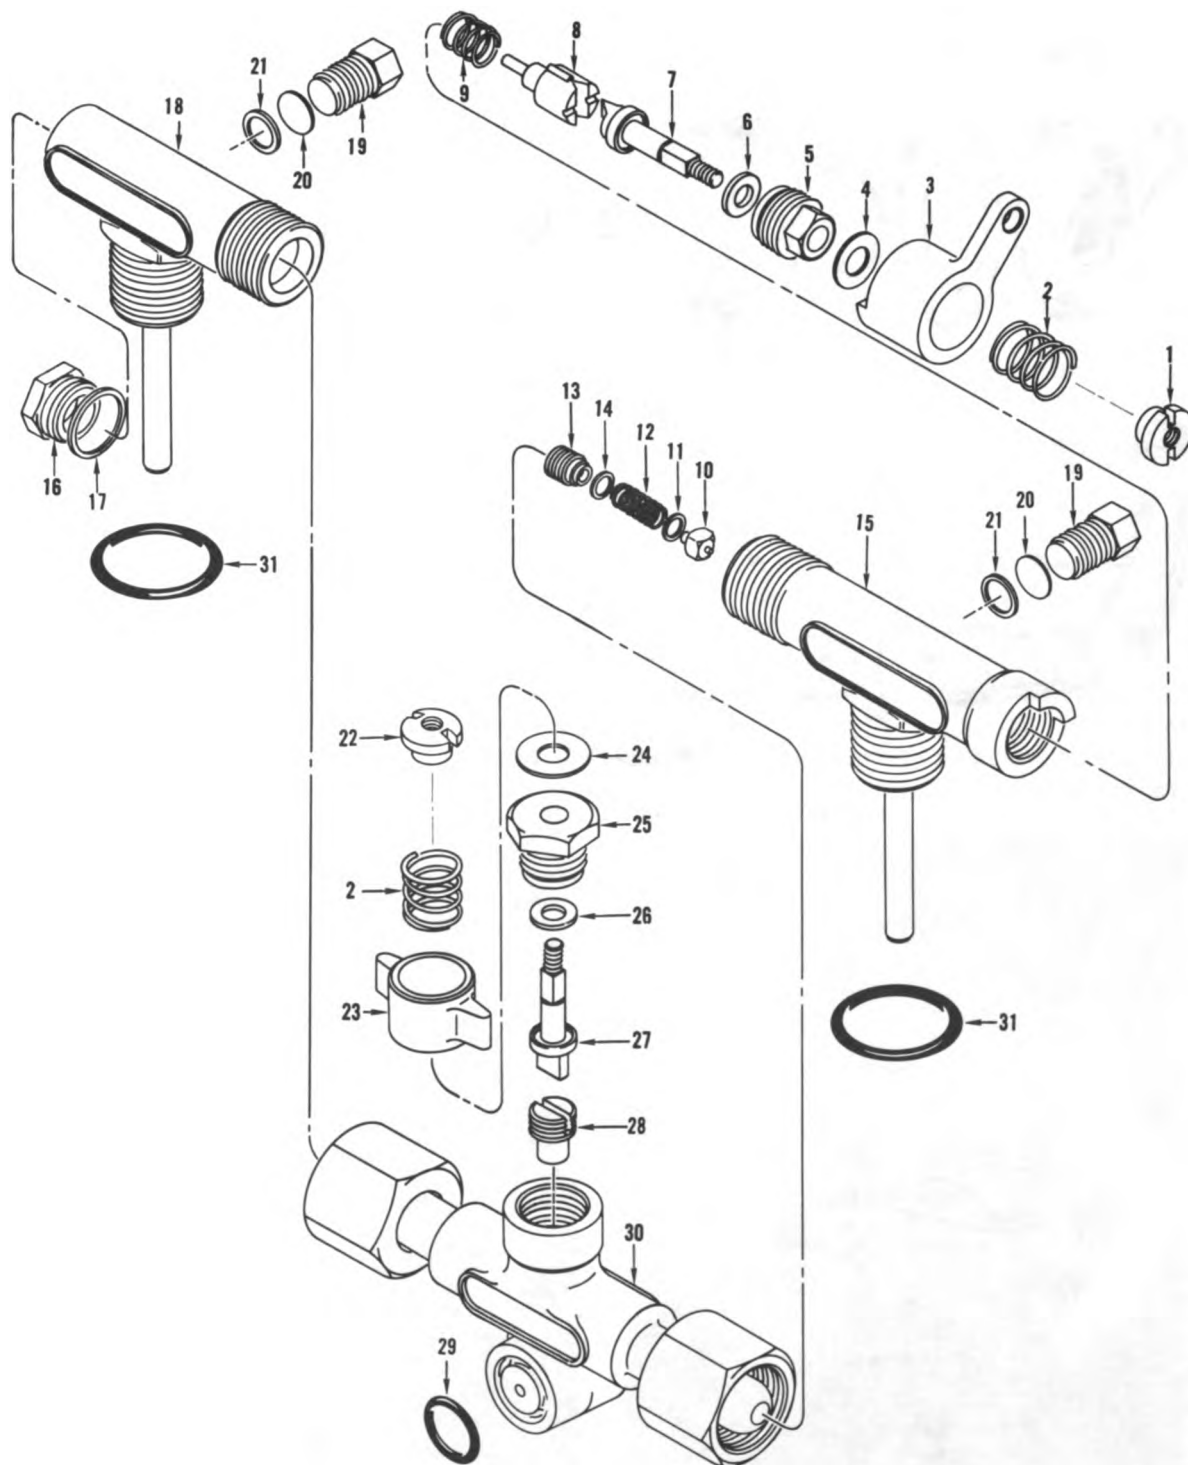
Cylinder-block manifold assembly—exploded view.
